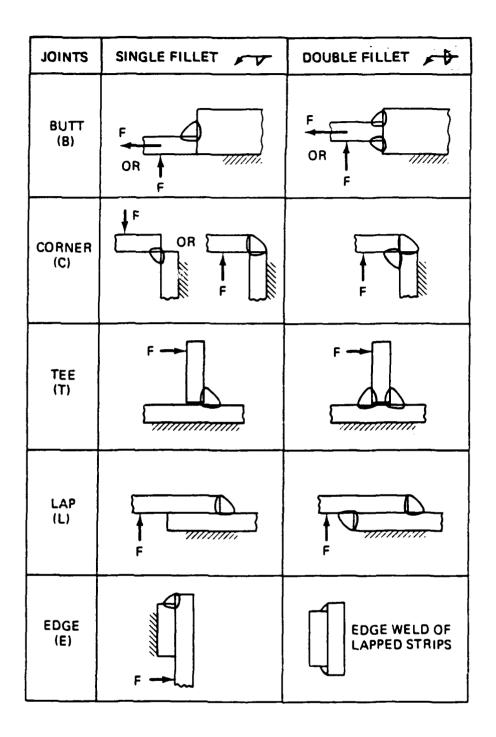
Filet weld used to make the five basic joints [26]
